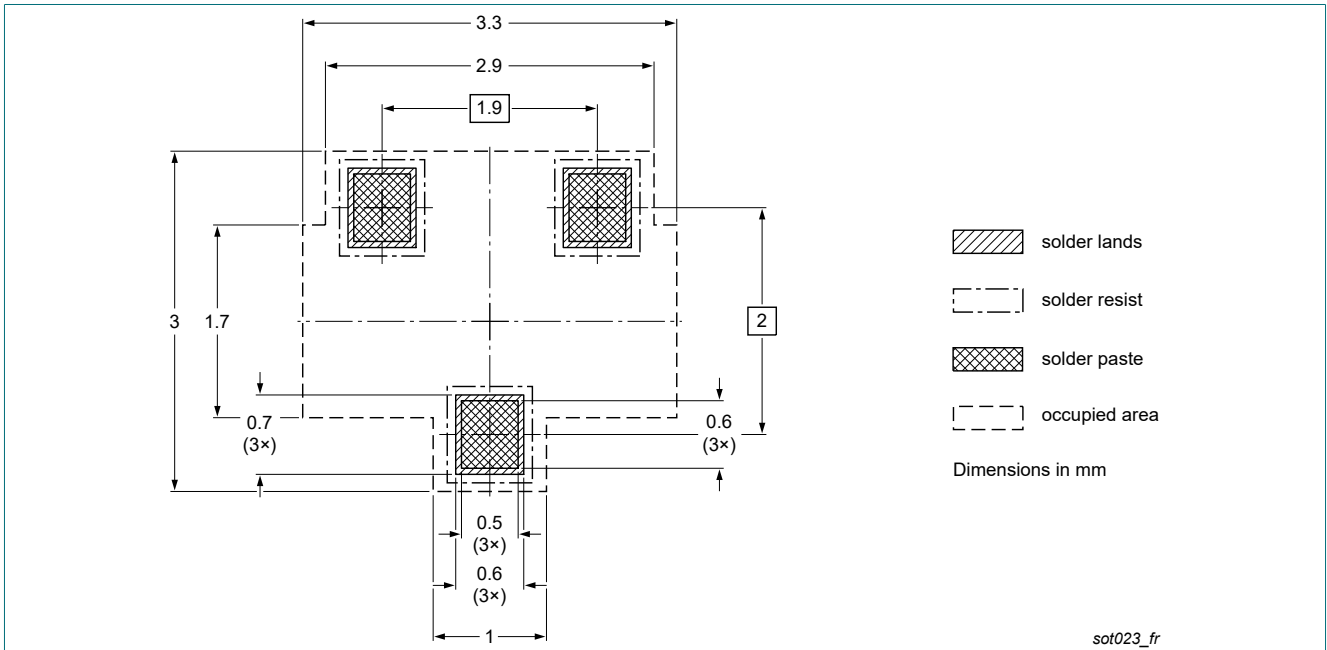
Reflow soldering footprint for TO-236AB (SOT23)
